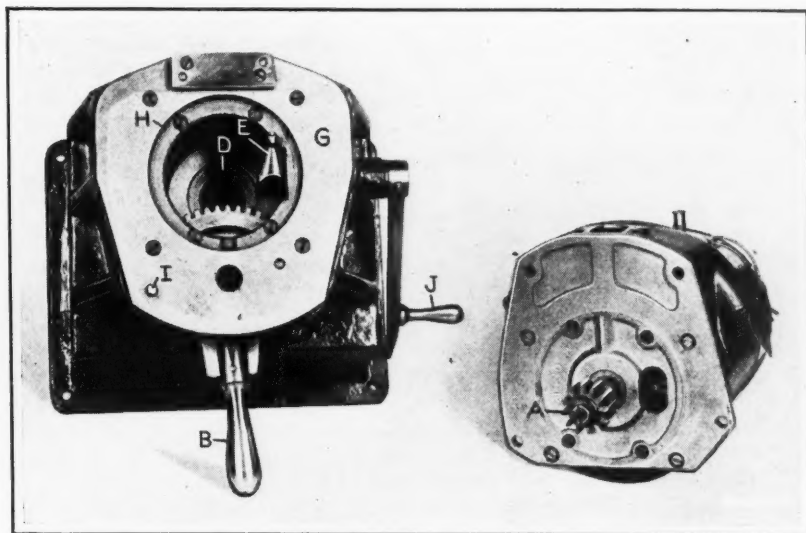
Functional Gage used in Final Inspection of Motor Generators
